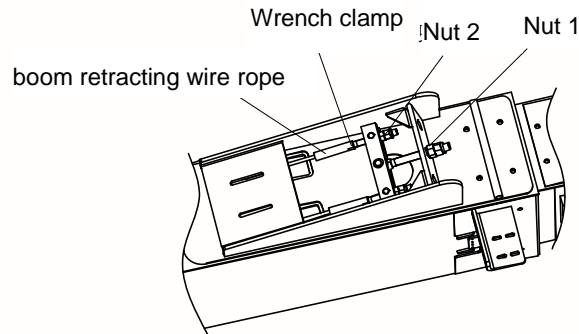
Removal view of the retractable boom rope balancing mechanism
